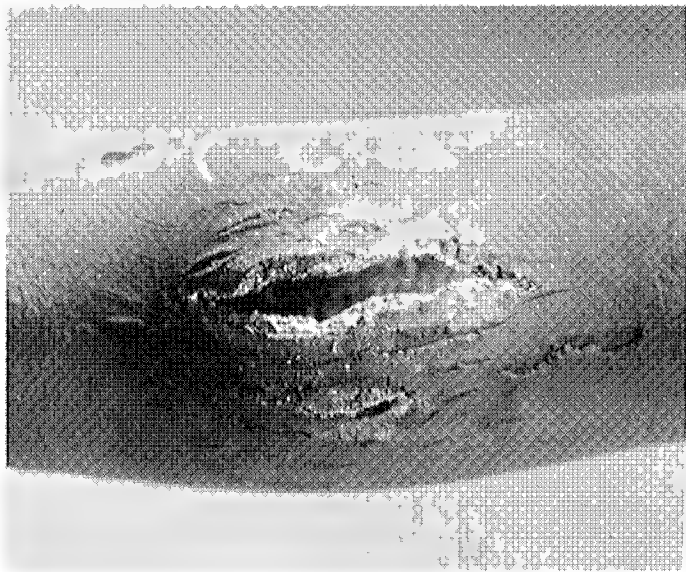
Boiler water contamination of the steam caused superheater deposits, which led to tube metal overheating and failure.
